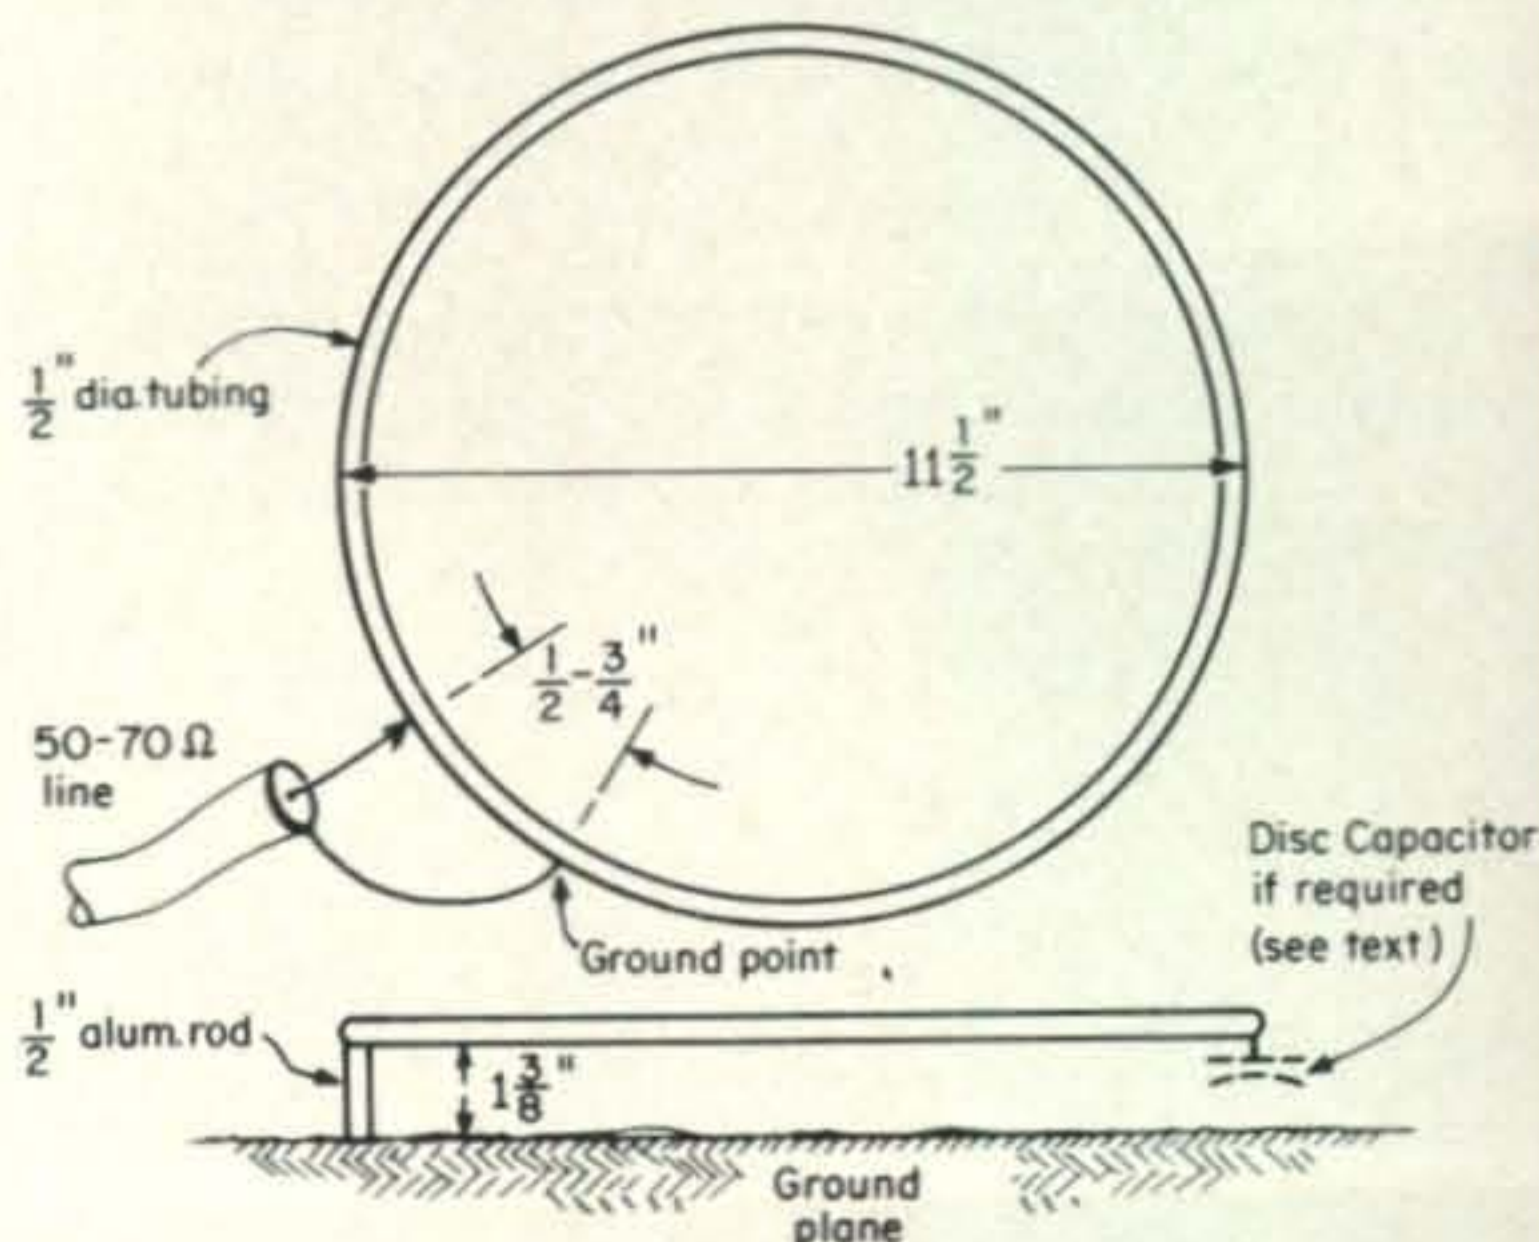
Top and side view of half-wave ring antenna dimensioned for 2 meters.
